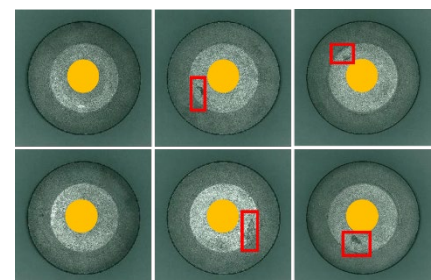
Mechanical parts without and with a defect marked with a red rectangle.
